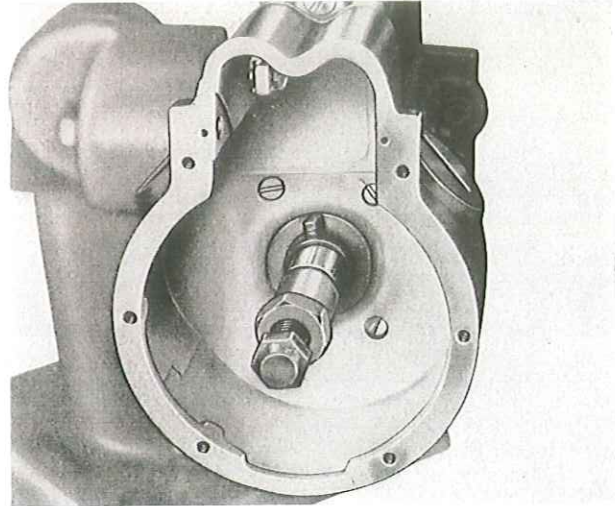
Removing the coupling of the vibration damper from the pump camshaft using puller A 427011.
